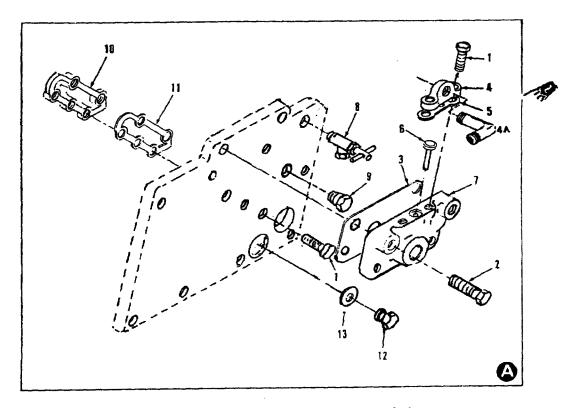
Fuel Injection Pump (Sheet 2 of 4)
